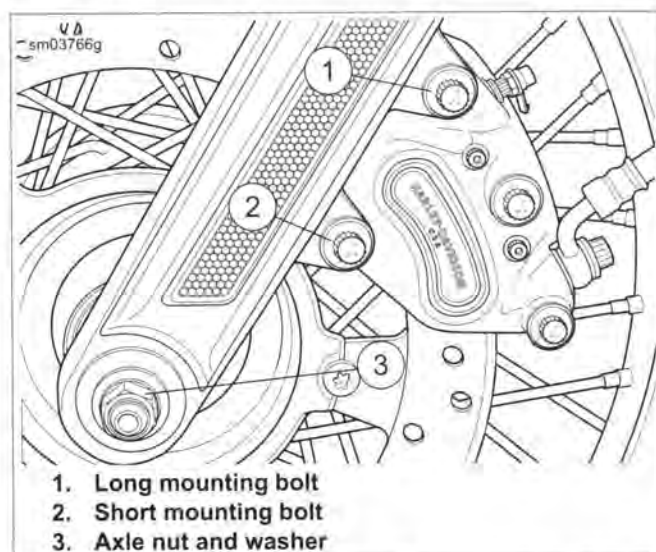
Front Caliper and Axle Mounting (Left Side)
